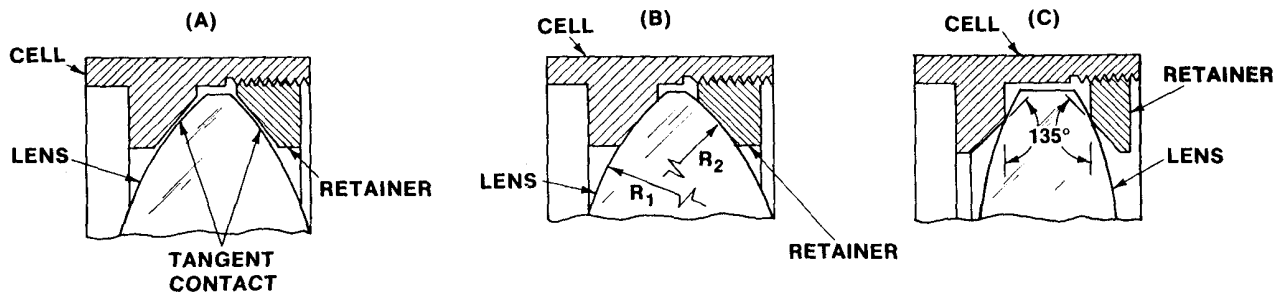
Three configurations for glass-to-metal interface in retaining ring type lens mounts (a) tangential, (b) spherical, (c) obtuse angle
